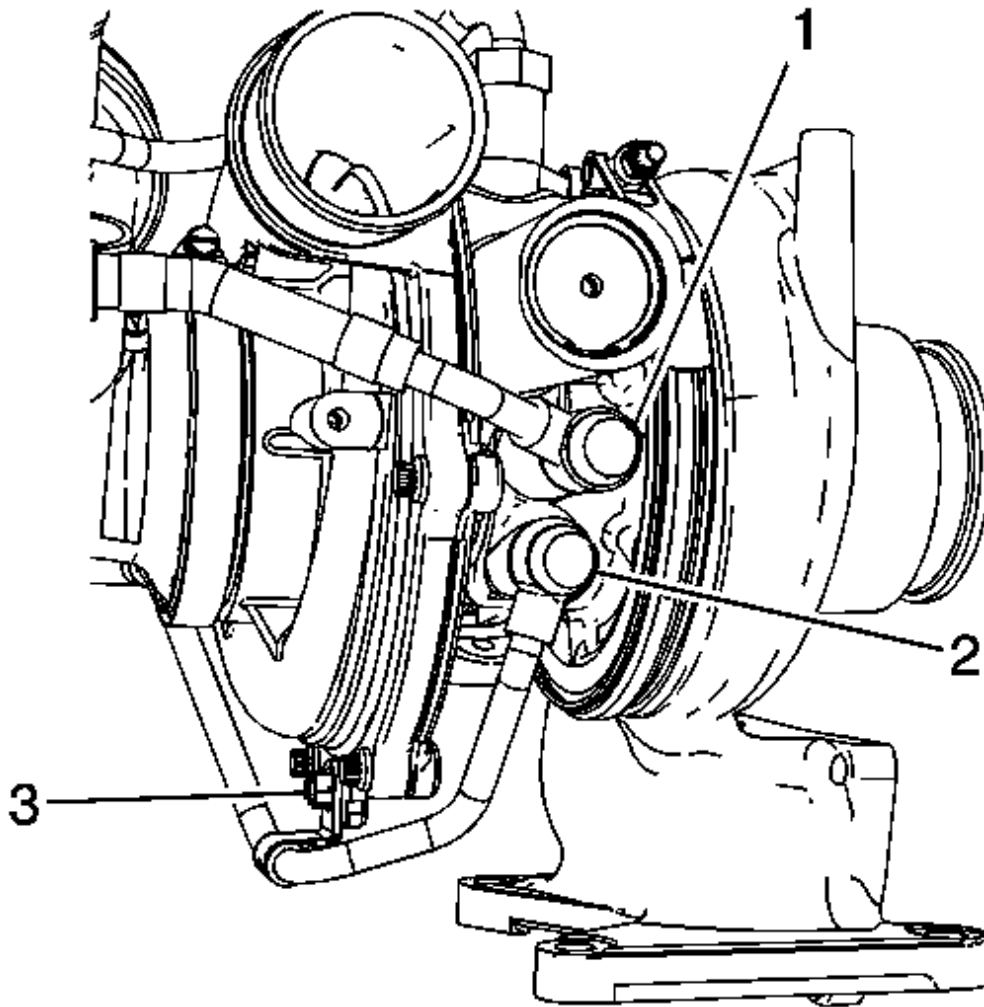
View Of Turbocharger Outlet Coolant Pipe
